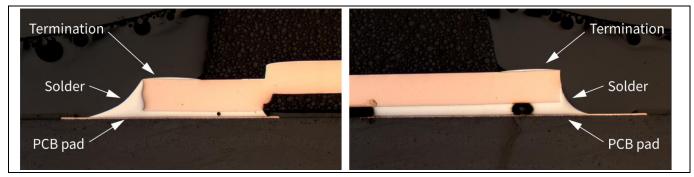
Cross section of a TDSON-8 assembled on board. The natural tilt of the package is visible causing the different appearance of the solder joint fillet on leads that are fused with the pad (right) compared to the single ones (left). However, the LTI tips are wetting properly on both sides.
